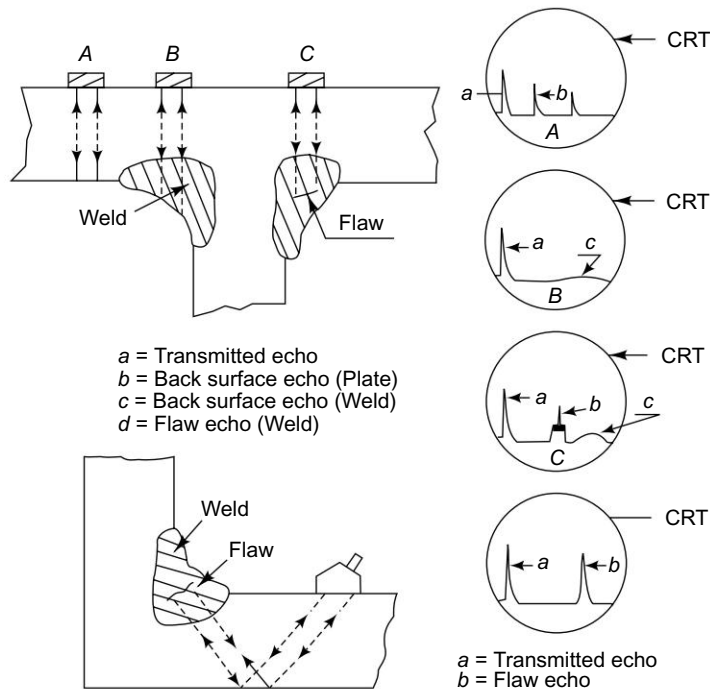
Fillet Weld Testing Using Angle Probe
